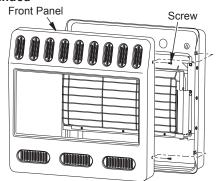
Removing Front Panel Of Heater (actual heater may vary from illustration)
